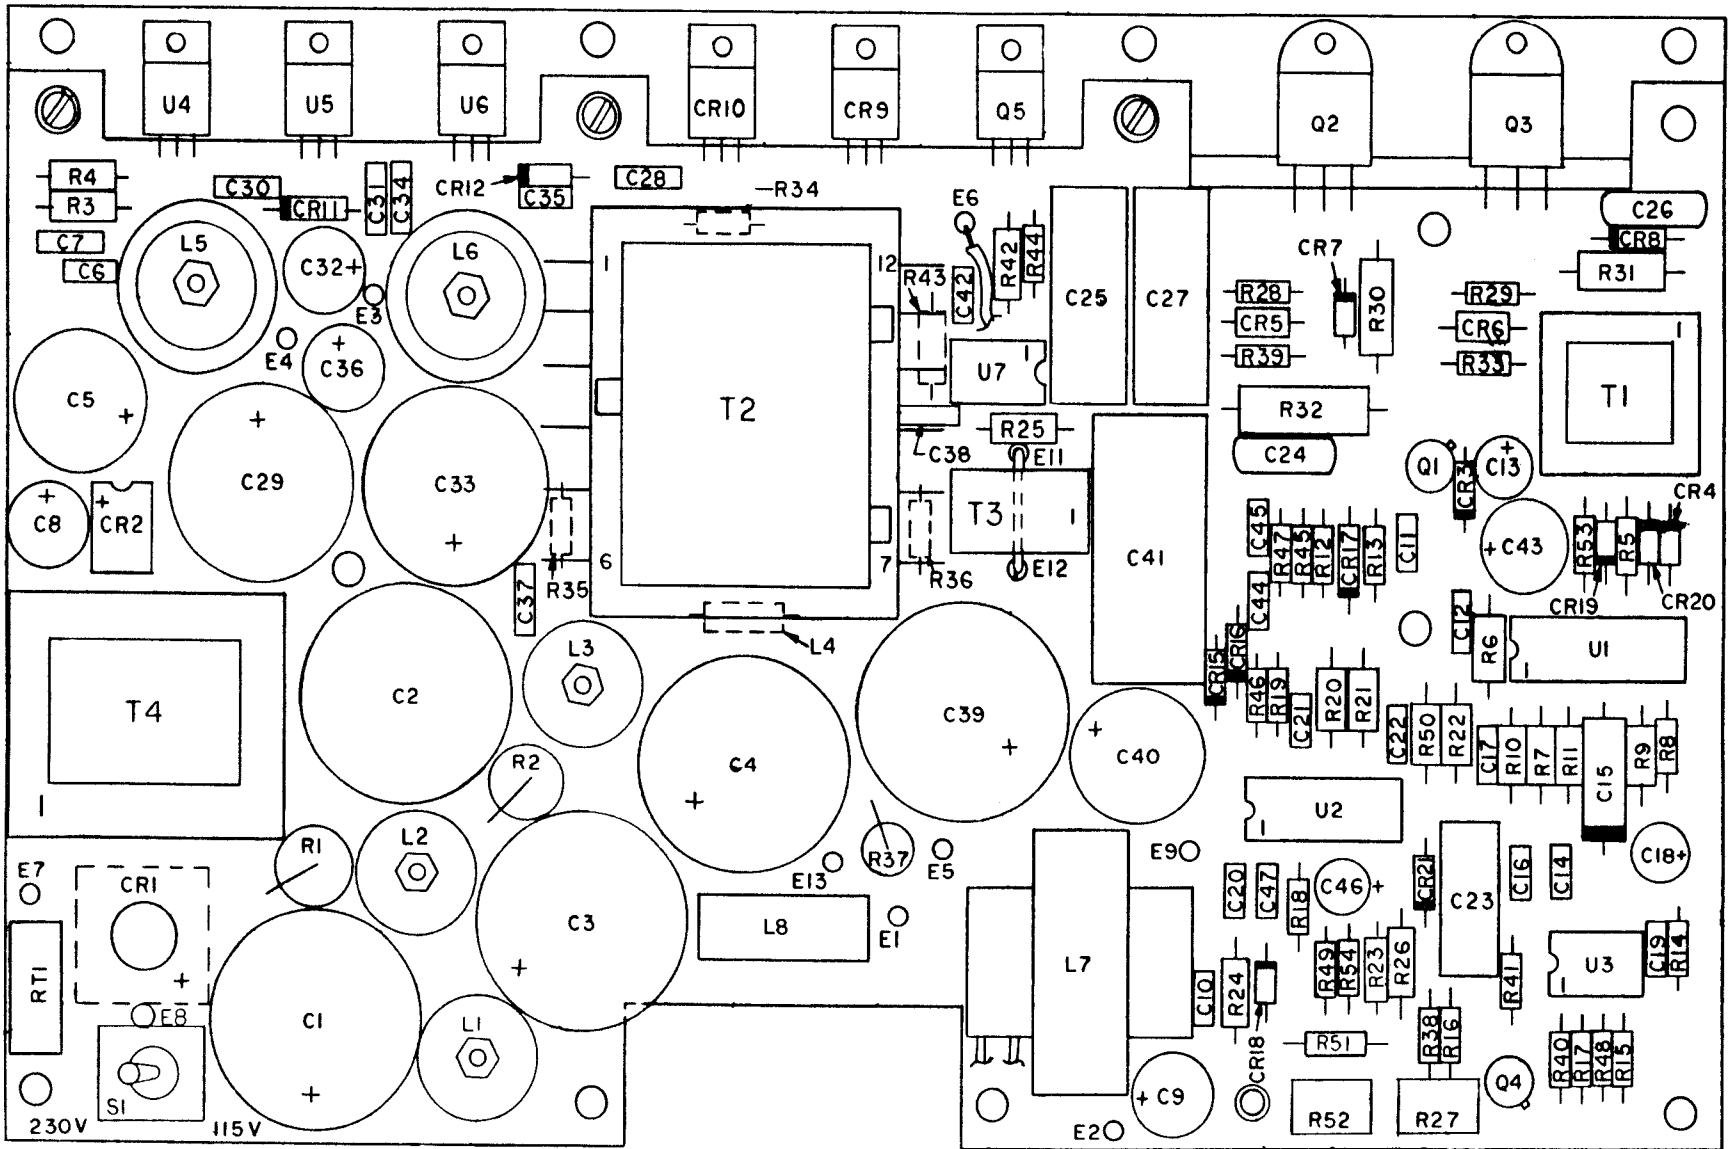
Power Supply PWB Assembly A9A1 Component Locations (10133-1220, Rev. F)
